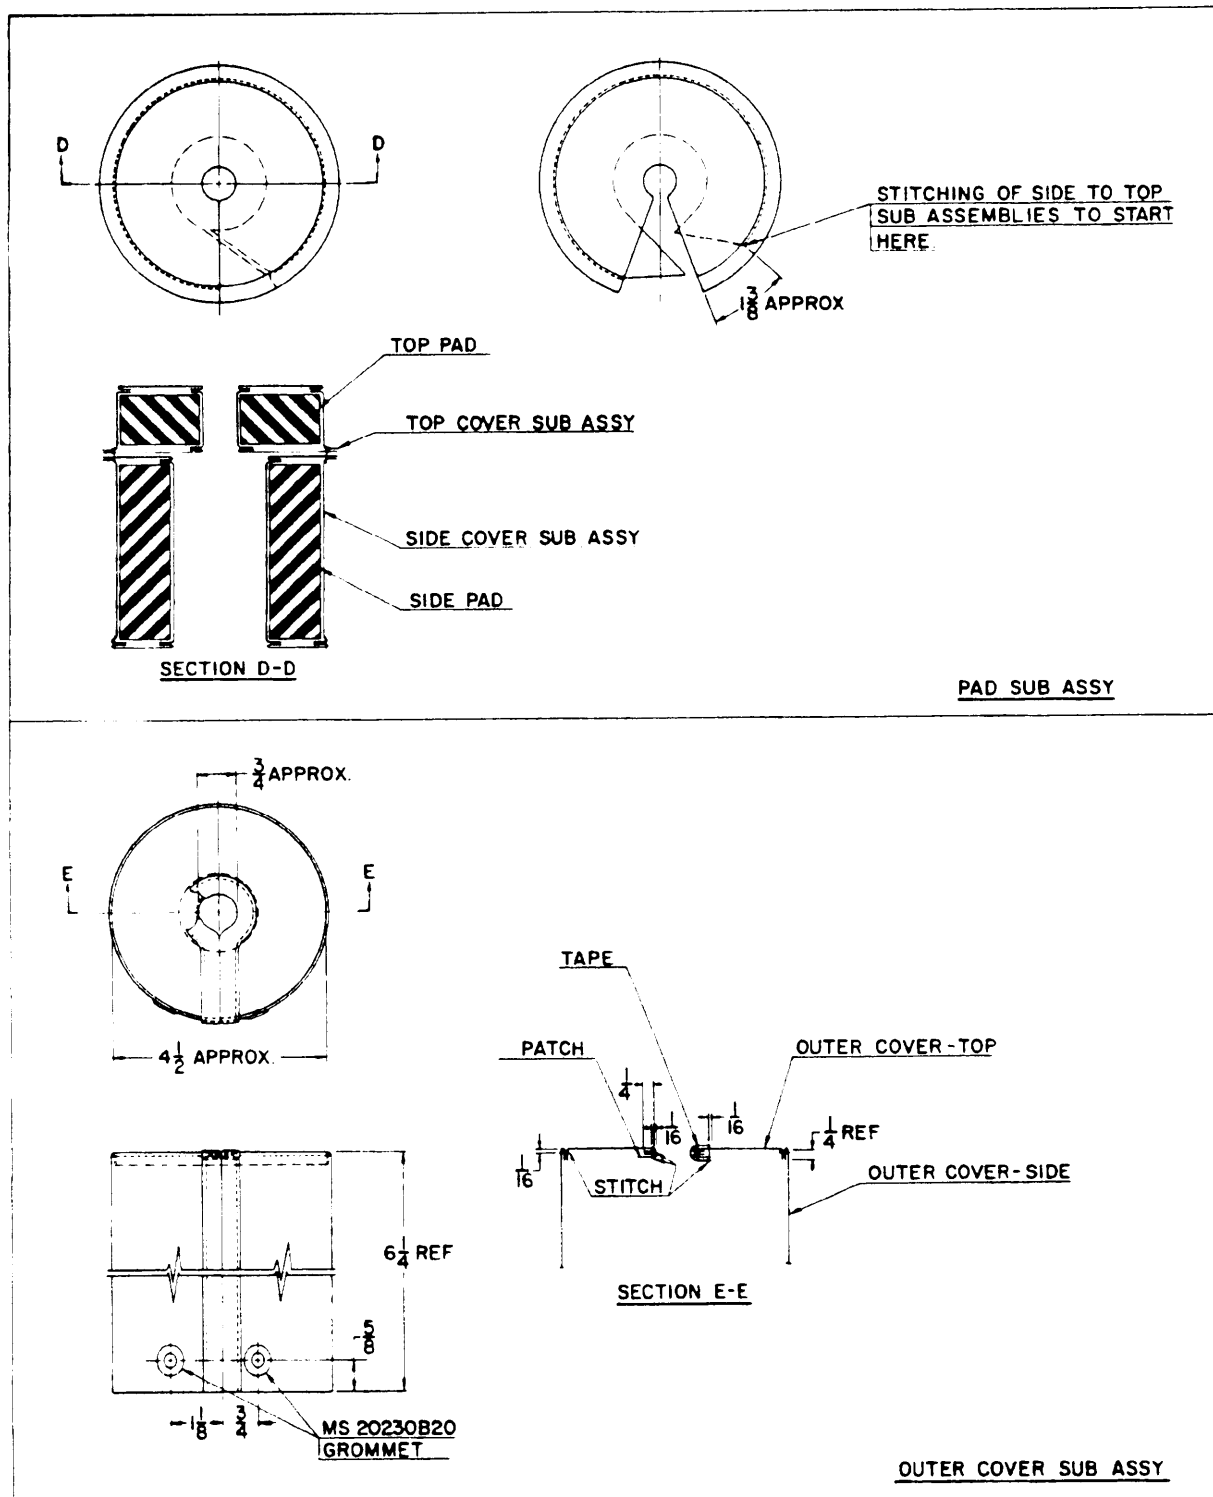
Cable Weight Cover Construction Details (Sheet 2)
